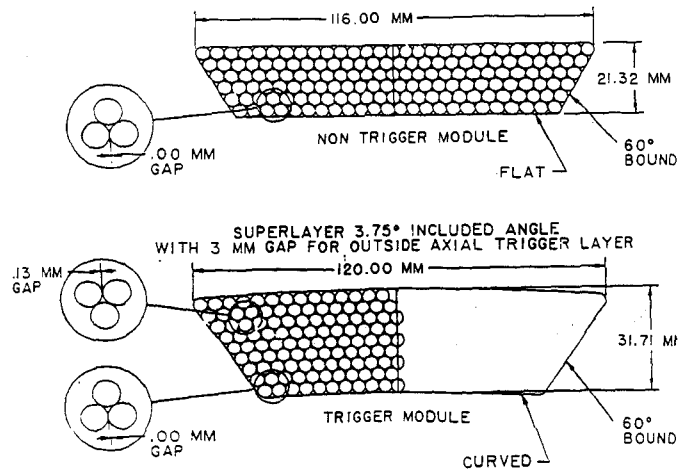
The basic module design is shown here schematically. The two basic designs are shown; a 6 layer module for non-trigger layers and stereo layers, and a 9 layer trigger module that has all straws on a radial line. The present design will probably use an 8 layer trigger module.
